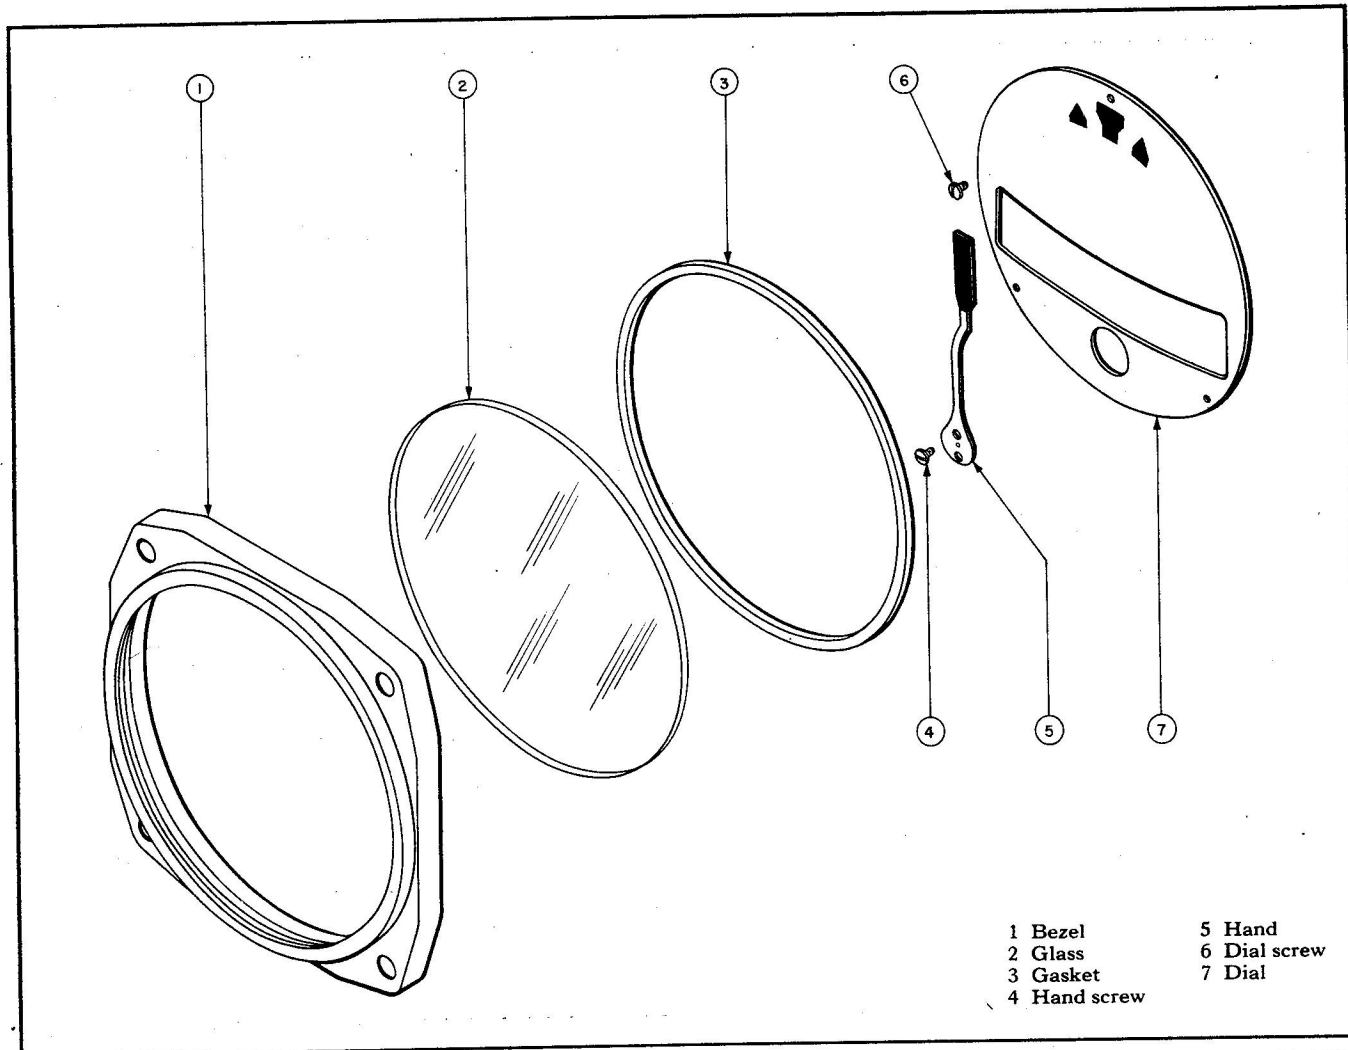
Exploded View Drawing—Bezel Assembly—Navy Types FSSC 18-I-462 (Pioneer Type 1713-1Y-A1), FSSC 88-I-3280 (Pioneer Type 1719-1AF-A1), and FSSC 88-I-3281 (Pioneer Types 1719-1AN-A1 and 1719-1AQ-A3).
